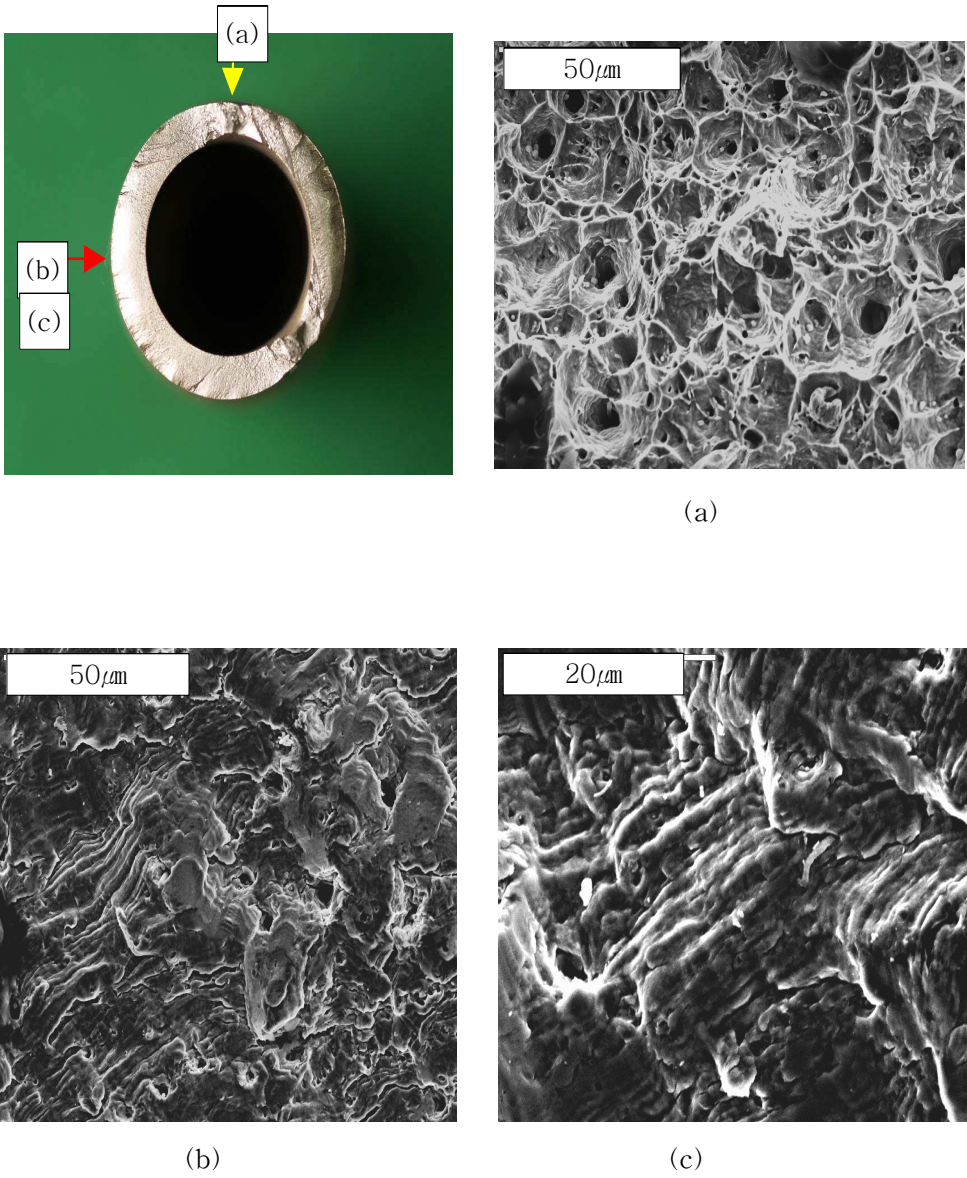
Fractographs of specimen fractured under fatigue stress amplitude of 1000Kg : (a) ductile fractured specimen, (b),(c) fatigue stress fractured specimen
